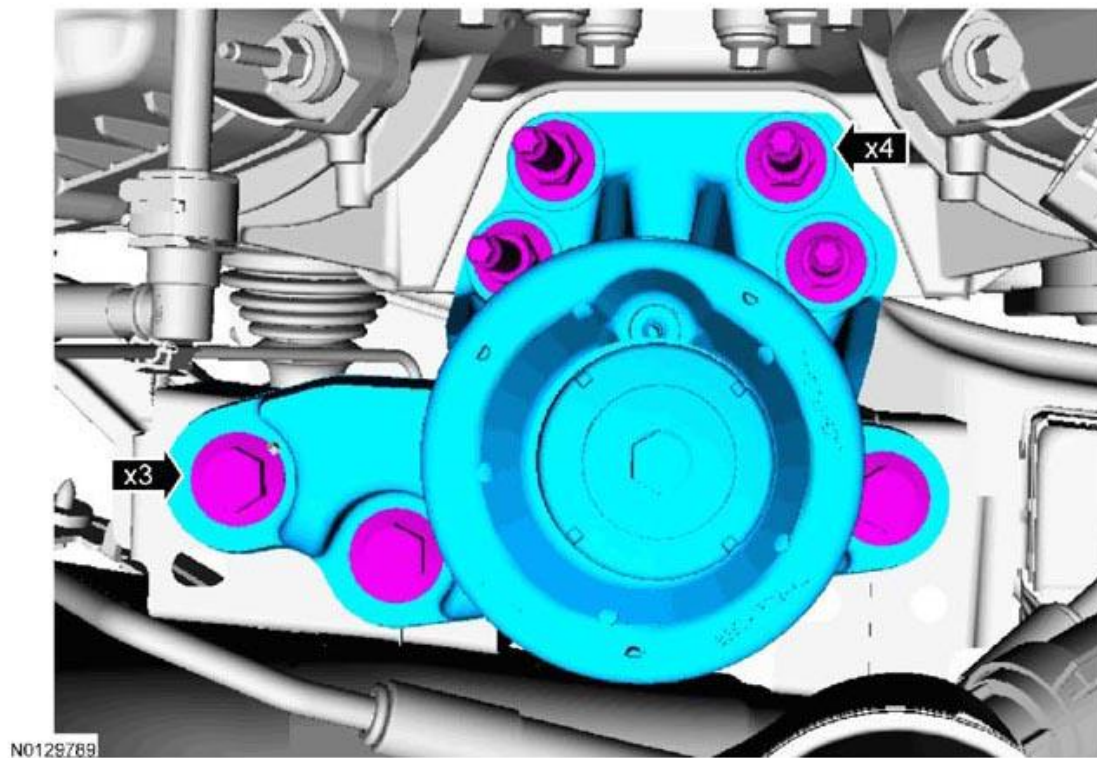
Locating Fuel Injection Pump Bracket Nuts
